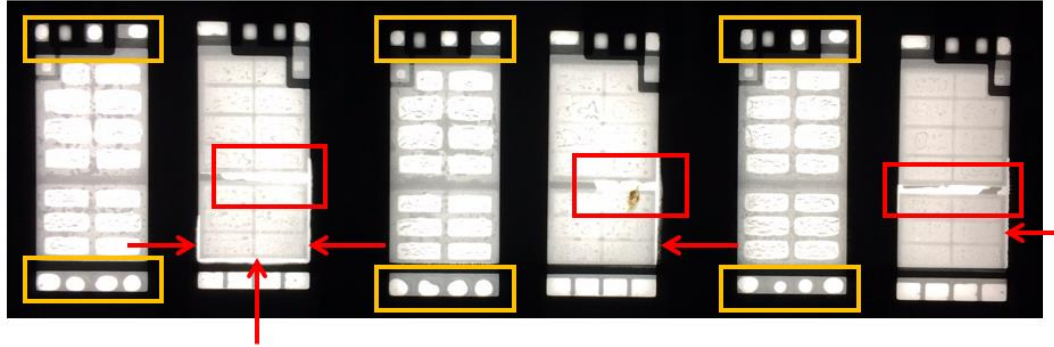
X-Ray image of the solder layer with 10% smaller stencil size.
